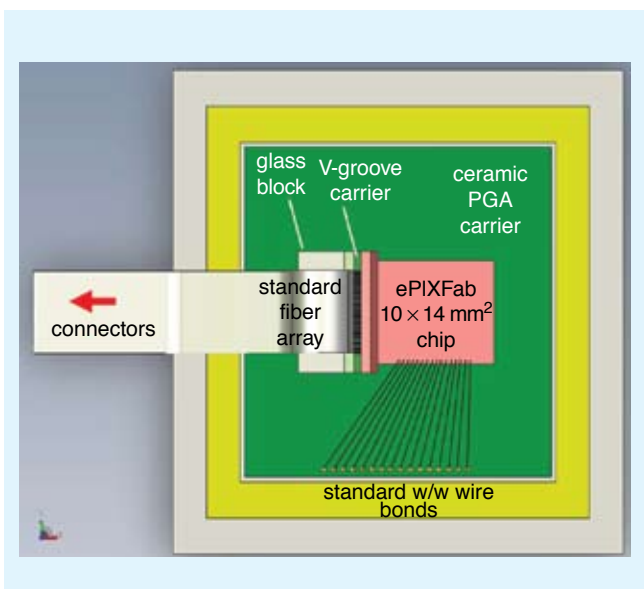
g-Pack, top view. The ePIXFab chip is optically coupled to a commercial fiber array (up to 32 fibers), while electrical connections are established via standard wire bonding techniques.
